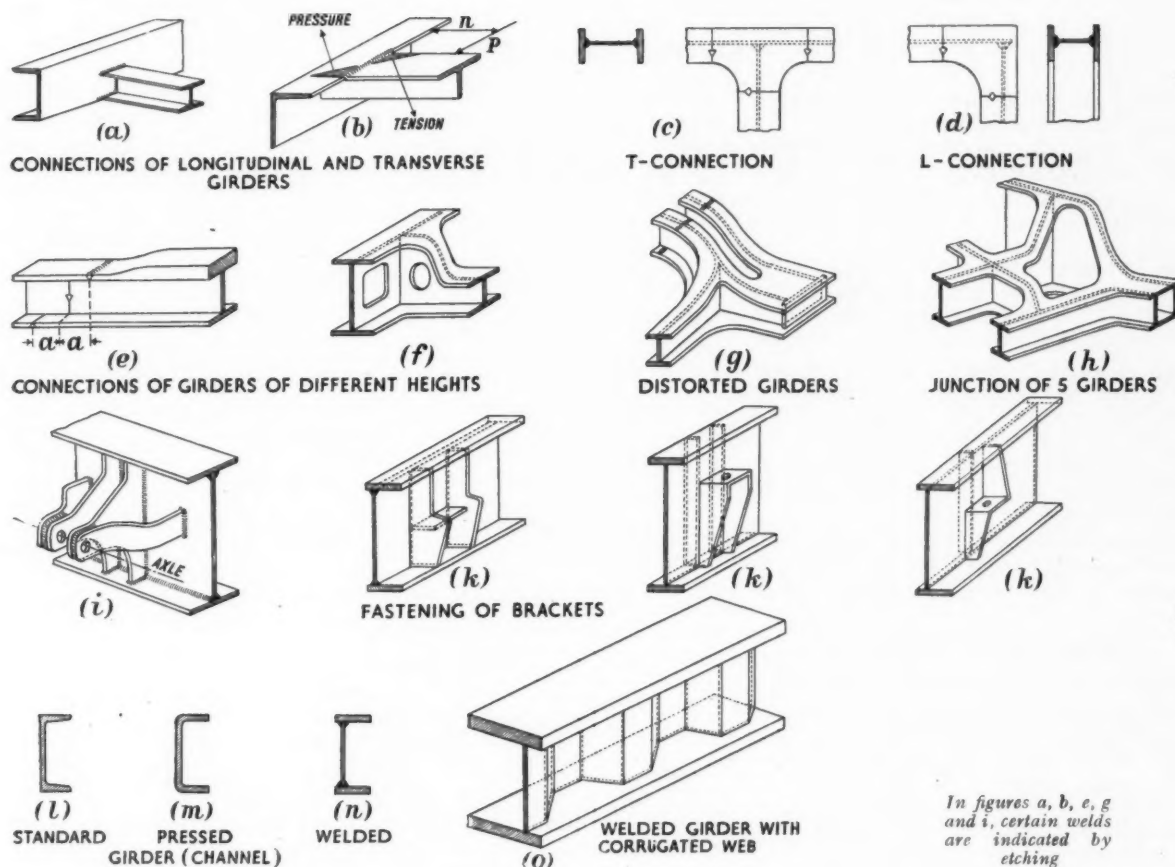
Various forms of welded joint for the body and underframe structure and the engine baseplate of railcars
